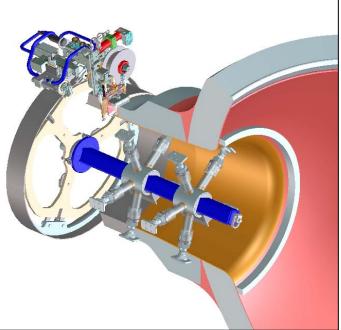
5 GT symmetric double downhill TIG hot wire narrow gap welding with Polycar MP
